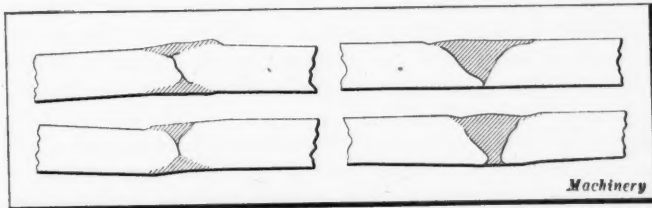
Welds made with too Sharp an Angle between Surfaces
